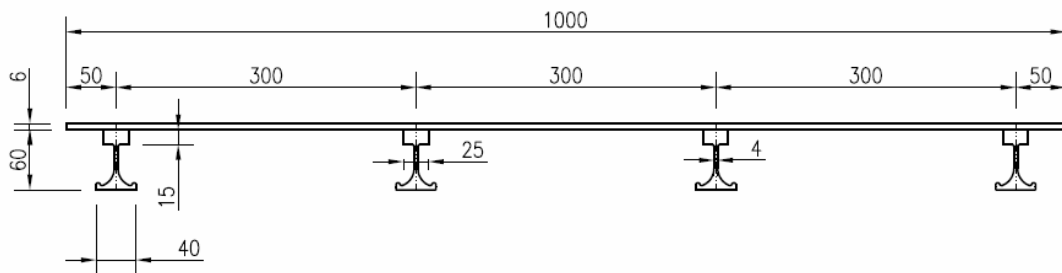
(a) Layout of test structure 17D for friction stir lap-joining in mm
